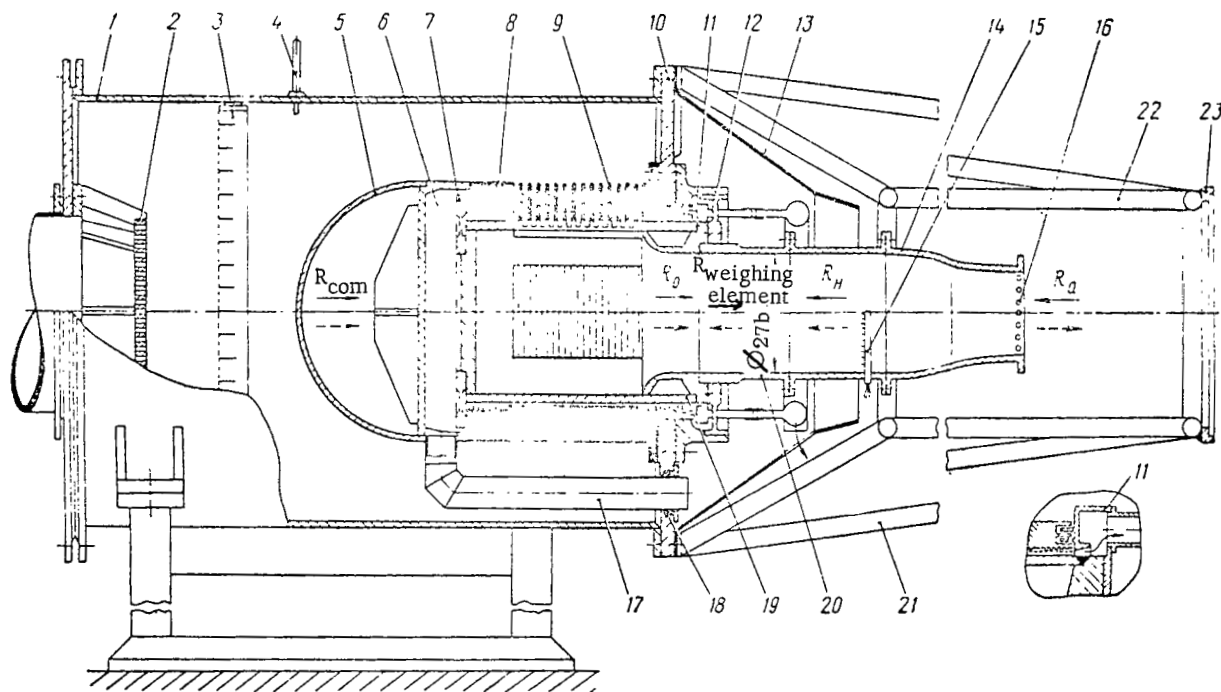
Design Schematic of Scales Section of Unit No. 2: 1, Reverser; 2, Baffle; 3, Screen with Grid; 4, Thermometer; 5, Cowling; 6, Counter Pressure Chamber; 7, Weighing Element; 8, Housing; 9, Vanes of Guide Device; 10, Flange; 11, Collector; 12, Weighing Element; 13, Reverberatory Housing; 14, Metered Valve; 15, Total Pressure Comb; 16, Metered Valve Drainage; 17, Counter Pressure Chamber Pipe; 18, Gasket; 19, Sliding Cylinder; 20, Reducer; 21, Bed Plate for Securing Coordinate Spacer and Calibrating Accessories; 22, Bedplate; 23, Flange.
